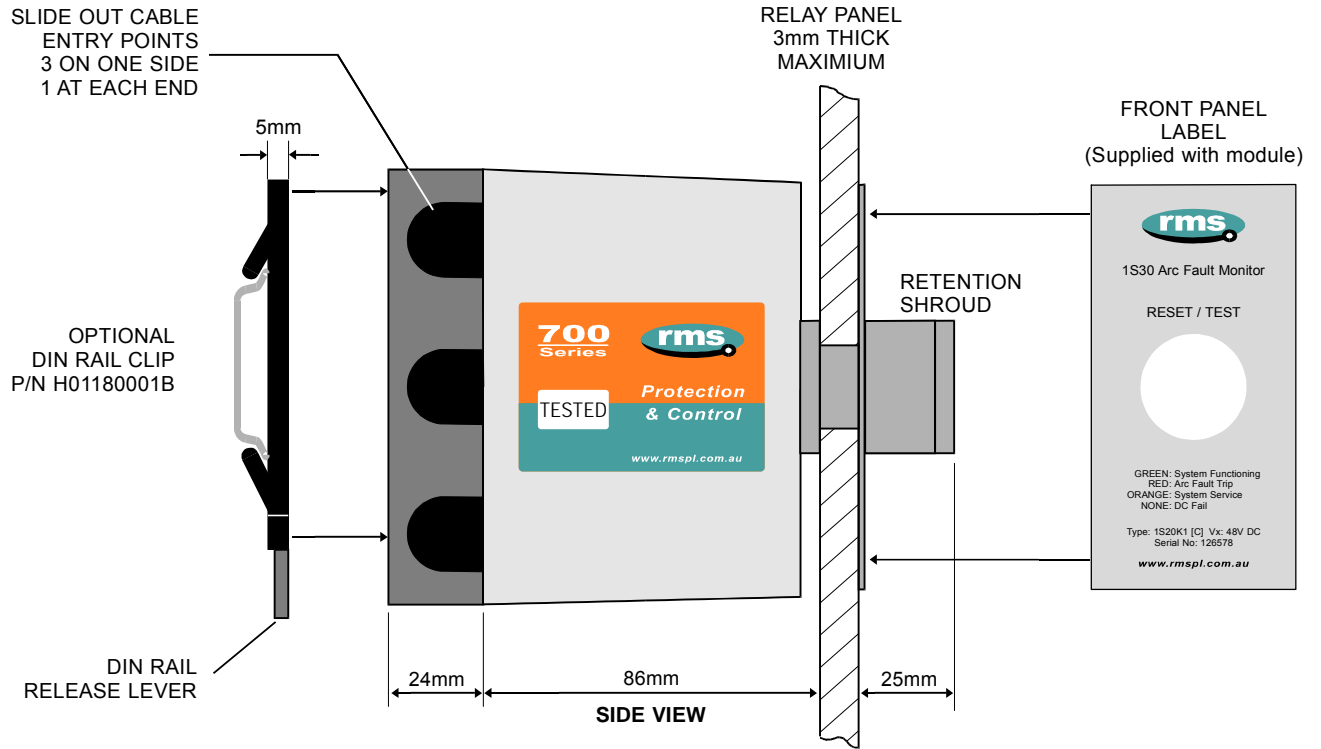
1S20 Panel mounting arrangement depicted – Optional DIN rail mounting available
